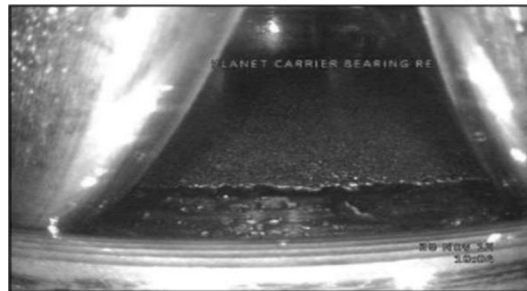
Spalling on the Low speed bearing responsible of Gearbox failure [23].
